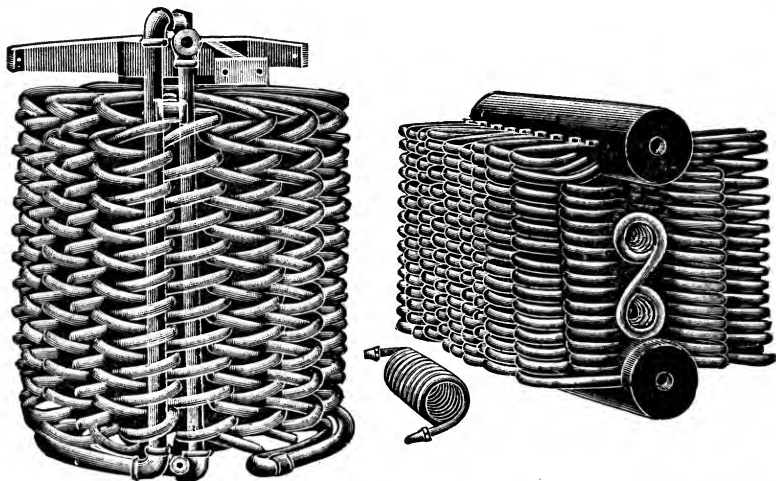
Ofeldt circular form or *helix curve* bent tube vertical drum automobile type boiler.
